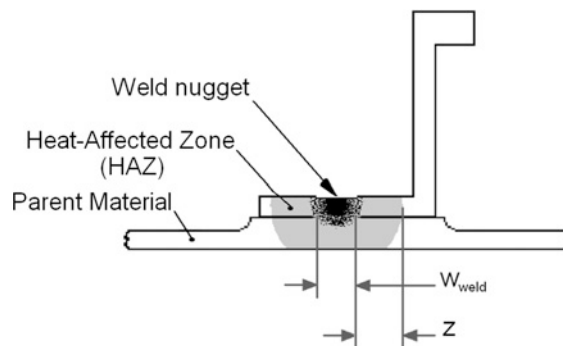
Weld cross-section. The figure depicts the welding effects under investigation.
